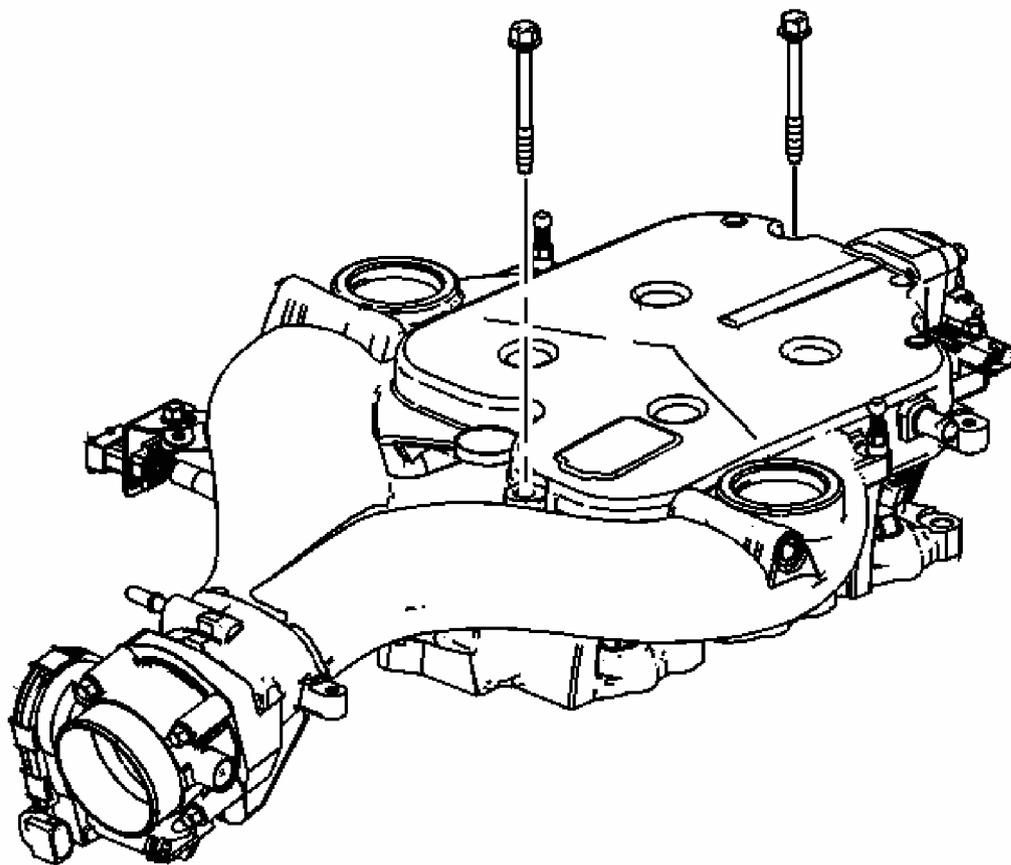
View Of Upper-To-Lower Intake Manifold Bolts
